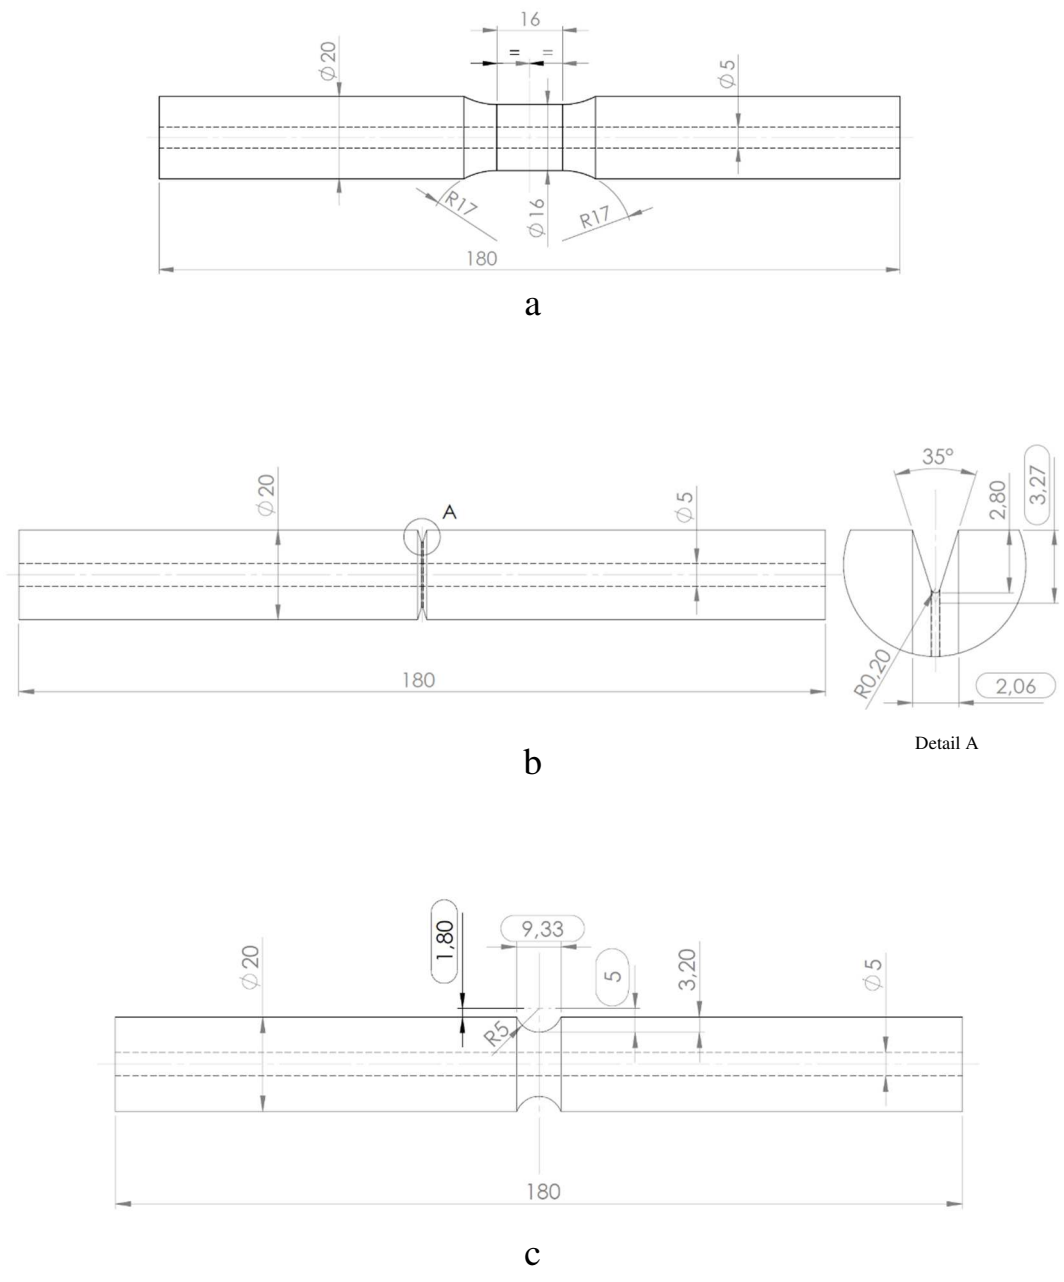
Axisymmetric specimen geometry: a) Smooth specimen; b) V-notched specimen; c) Semi-circular notched specimen (dimensions in millimetres)
